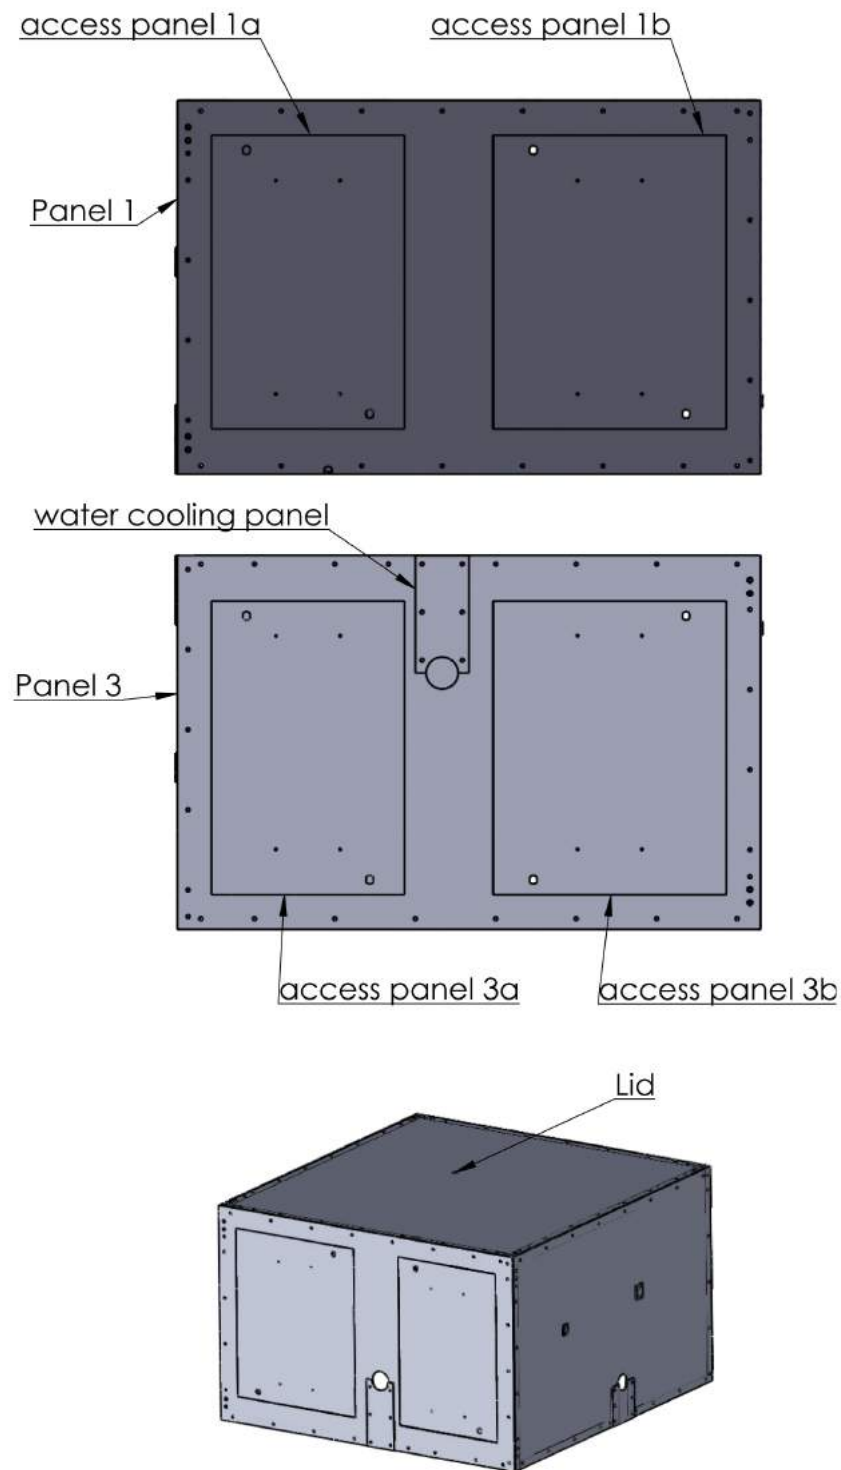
An assembly diagram of the Faraday cage showing the two sides which have access panels, and the lid of the system. The technical drawings for Panel 1 are shown in Figures B.4 and B.5. Panel 3 is shown in Figures B.13 and B.14 and the water cooling panel attached to it is shown in Figure B.15. The “a-type” and “b-type” access panels are the same for each main panel. The a-type access panel technical drawing is shown in Figure B.6 and the b-type is shown in Figure B.7. The lid is shown in Figures B.29 and B.30.
